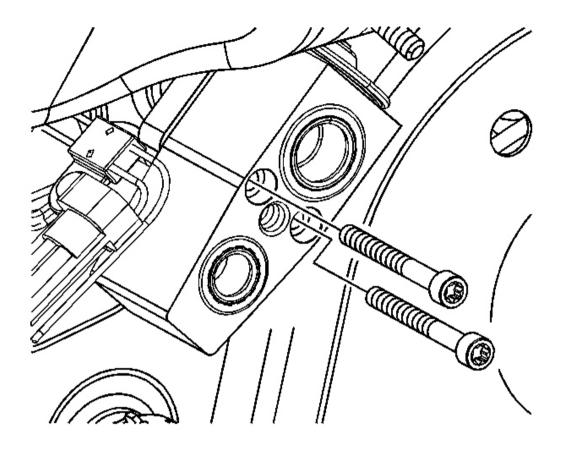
TXV, O-rings, Backing Plate & Protective Cap Courtesy of GENERAL MOTORS CORP.
